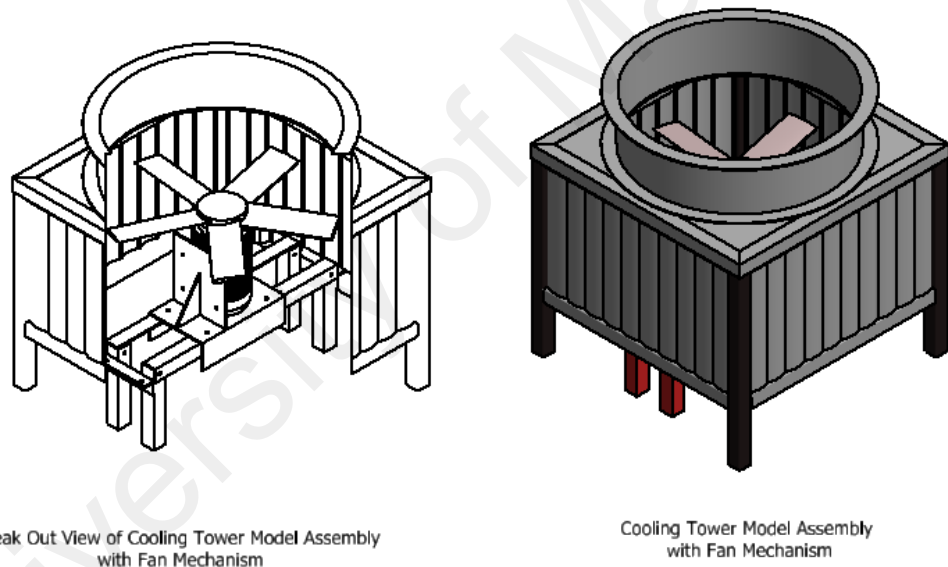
Assembly and exploded view of the cooling tower box
